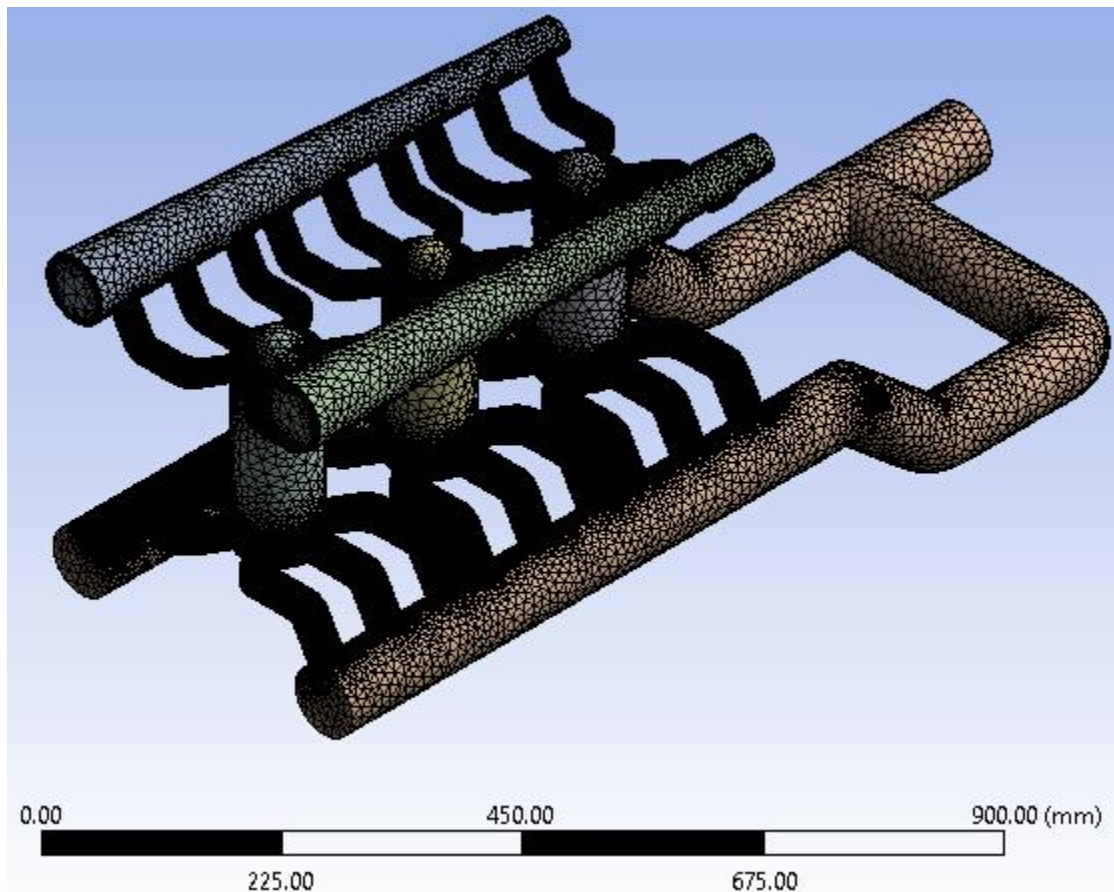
Isometric view of the meshed tapered manifold opposed piston engine
